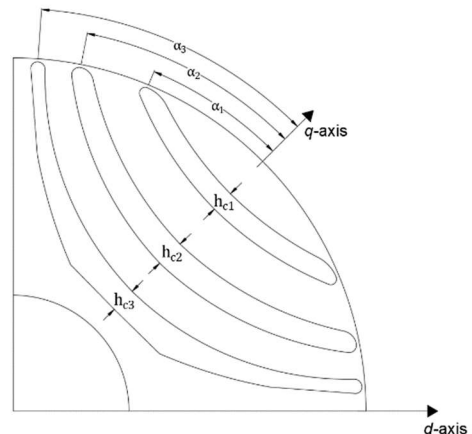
Cross-section of a rotor pole with the definition of the optimization variables for barrier design.
